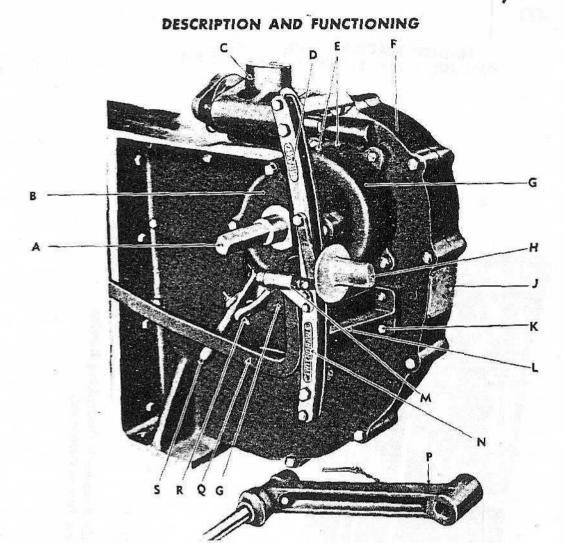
Rammer Loading Trough Spring Balance Unit and Control Interlock (Left Parking Table Removed)
